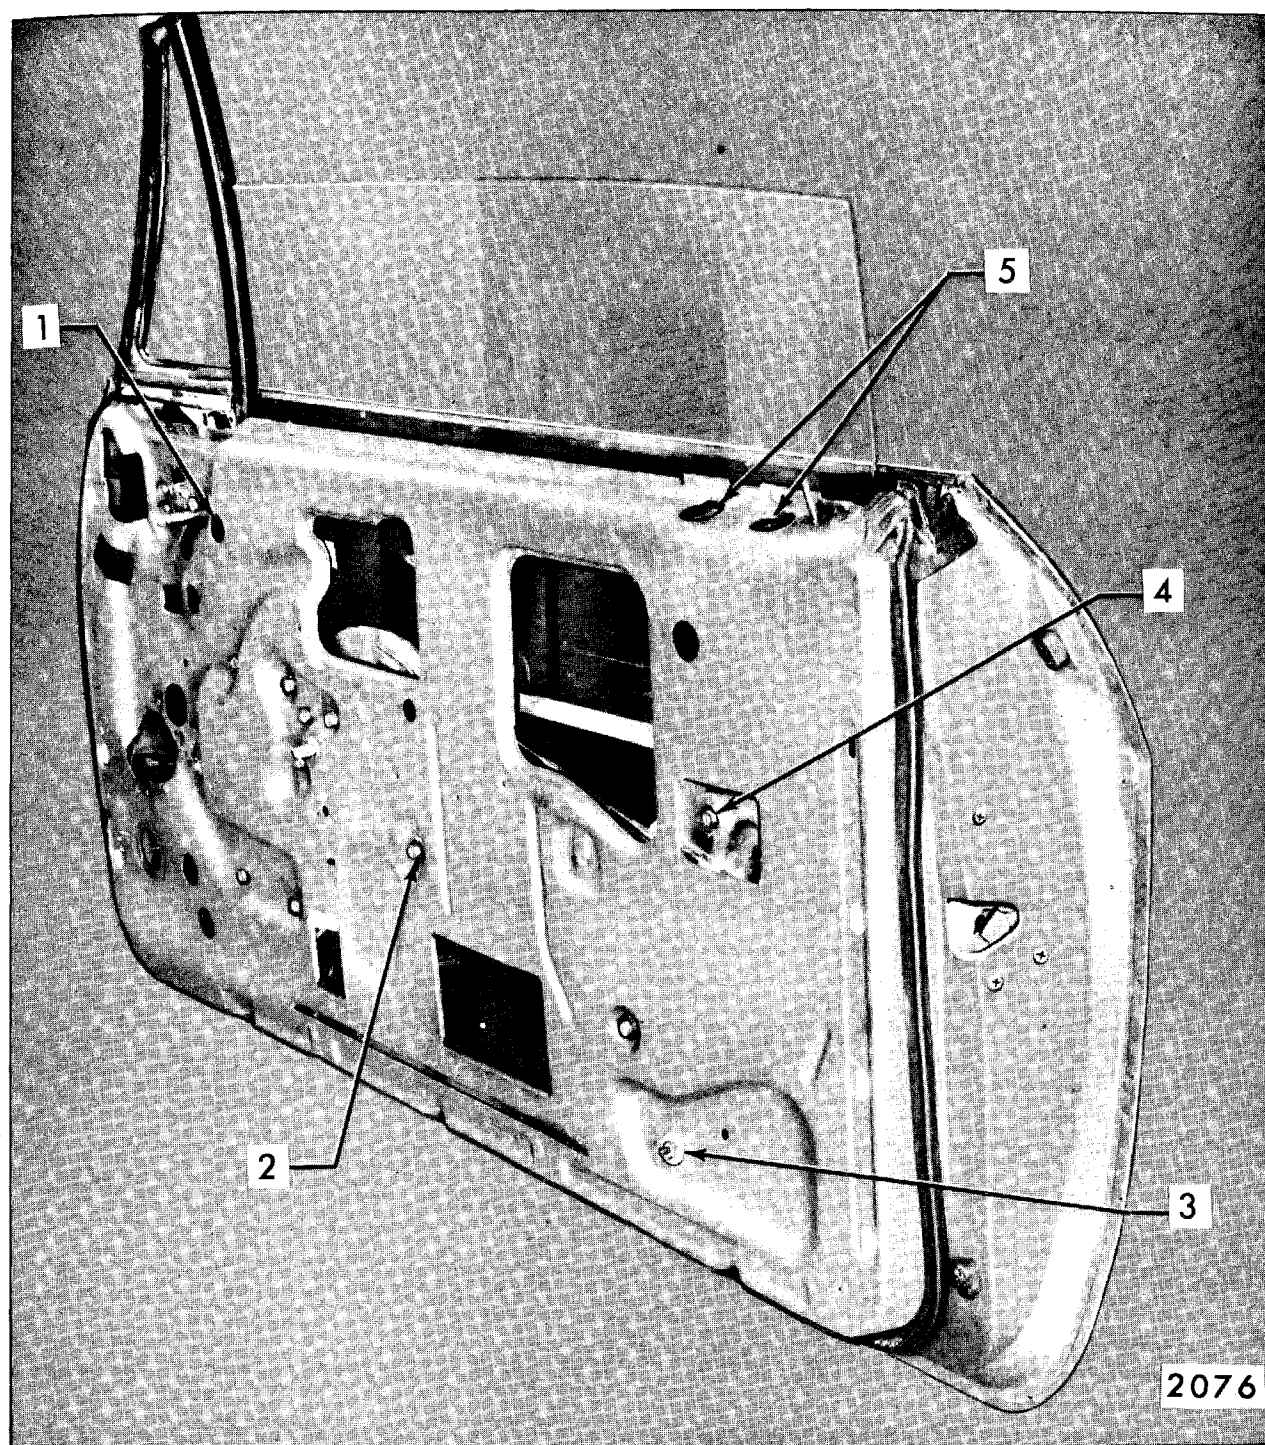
Front Door Window Removal - "B & C" Hardtop Styles
